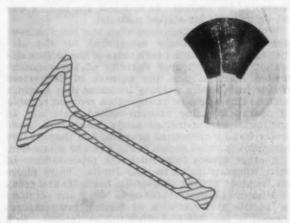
When making this hollow-head aircraft valve from air-melted material considerable care must be exercised to prevent cracking or folding of the inside neck surface. Experimental forgings of this part using a 14 Cr-14 Ni-3 W analysis with vacuum melting eliminated the cracking and folding in this critical area.
